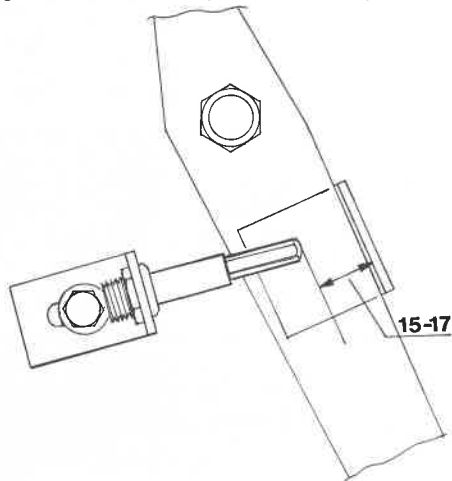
Contact for brake pedal travel, adjustment measurement
